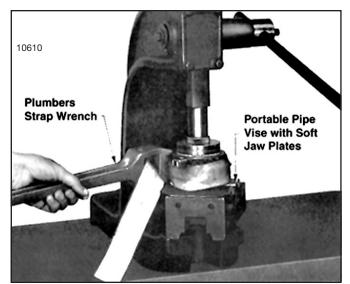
Winding Load Brake Gear Using a Strap Wrench to Set Up Load Brake Spring
